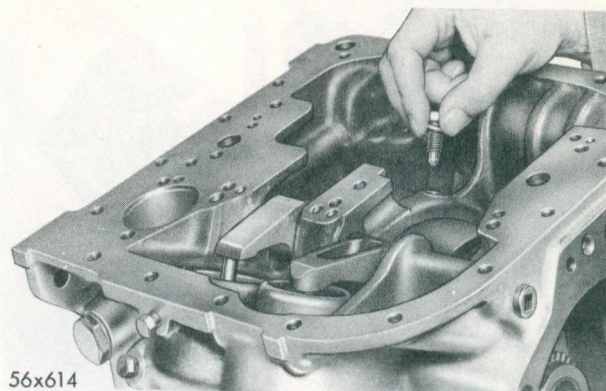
Removal and Installation of Intermediate Support Locating Screw
